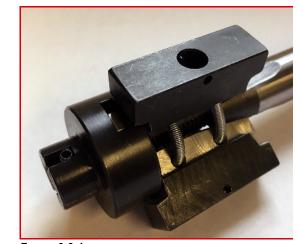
INSTALLED WEDGE SET WITH EXTENSIONS
